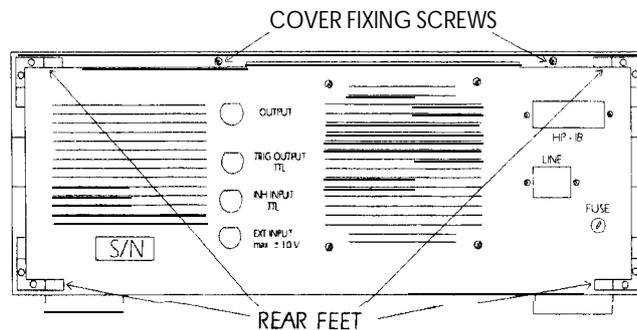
Rear Panel View Showing Cover Fixing Screws
